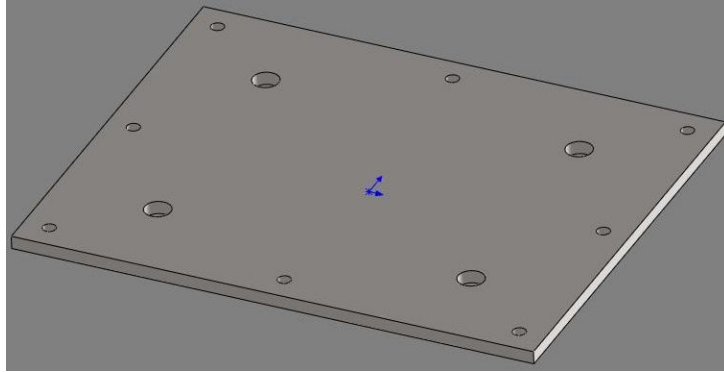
CAD of the Pneumatic Mount Showing Bolt Holes
